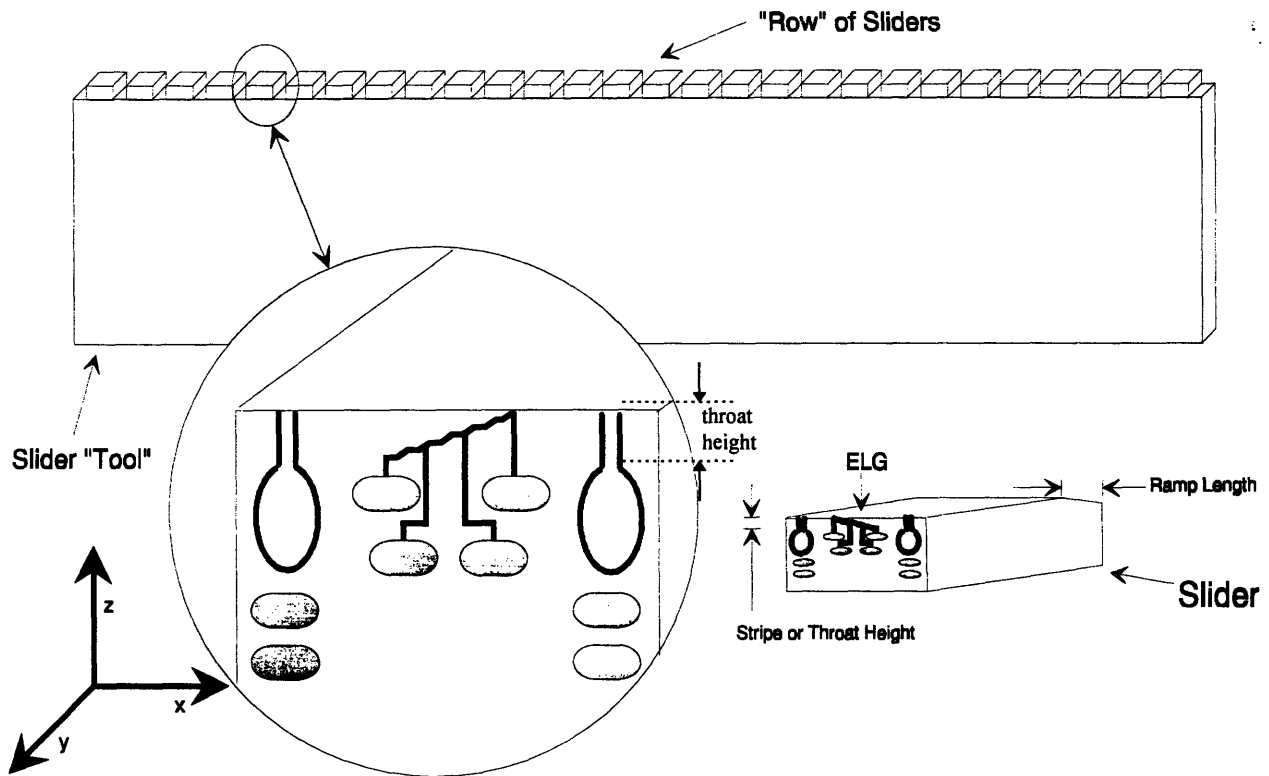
Row of ceramic sliders mounted on a lapping tool bar.
